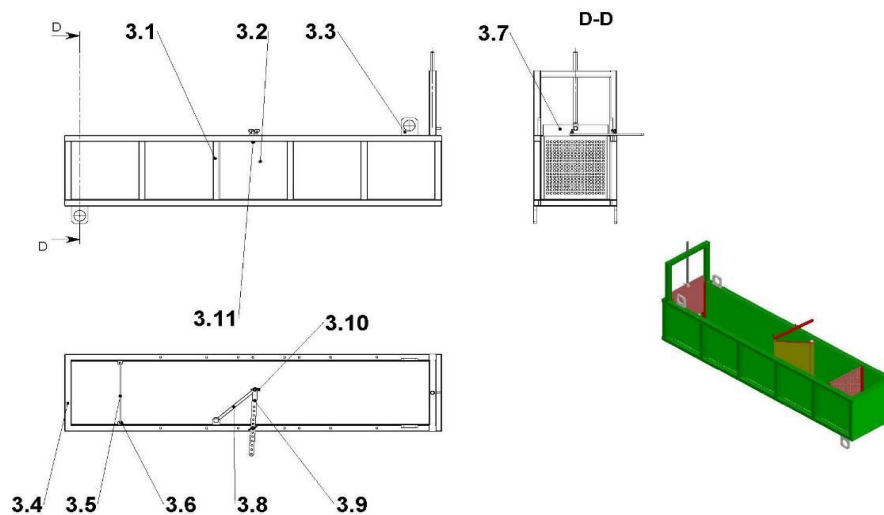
Assembly-mounting drawing and isometric view of water ford
